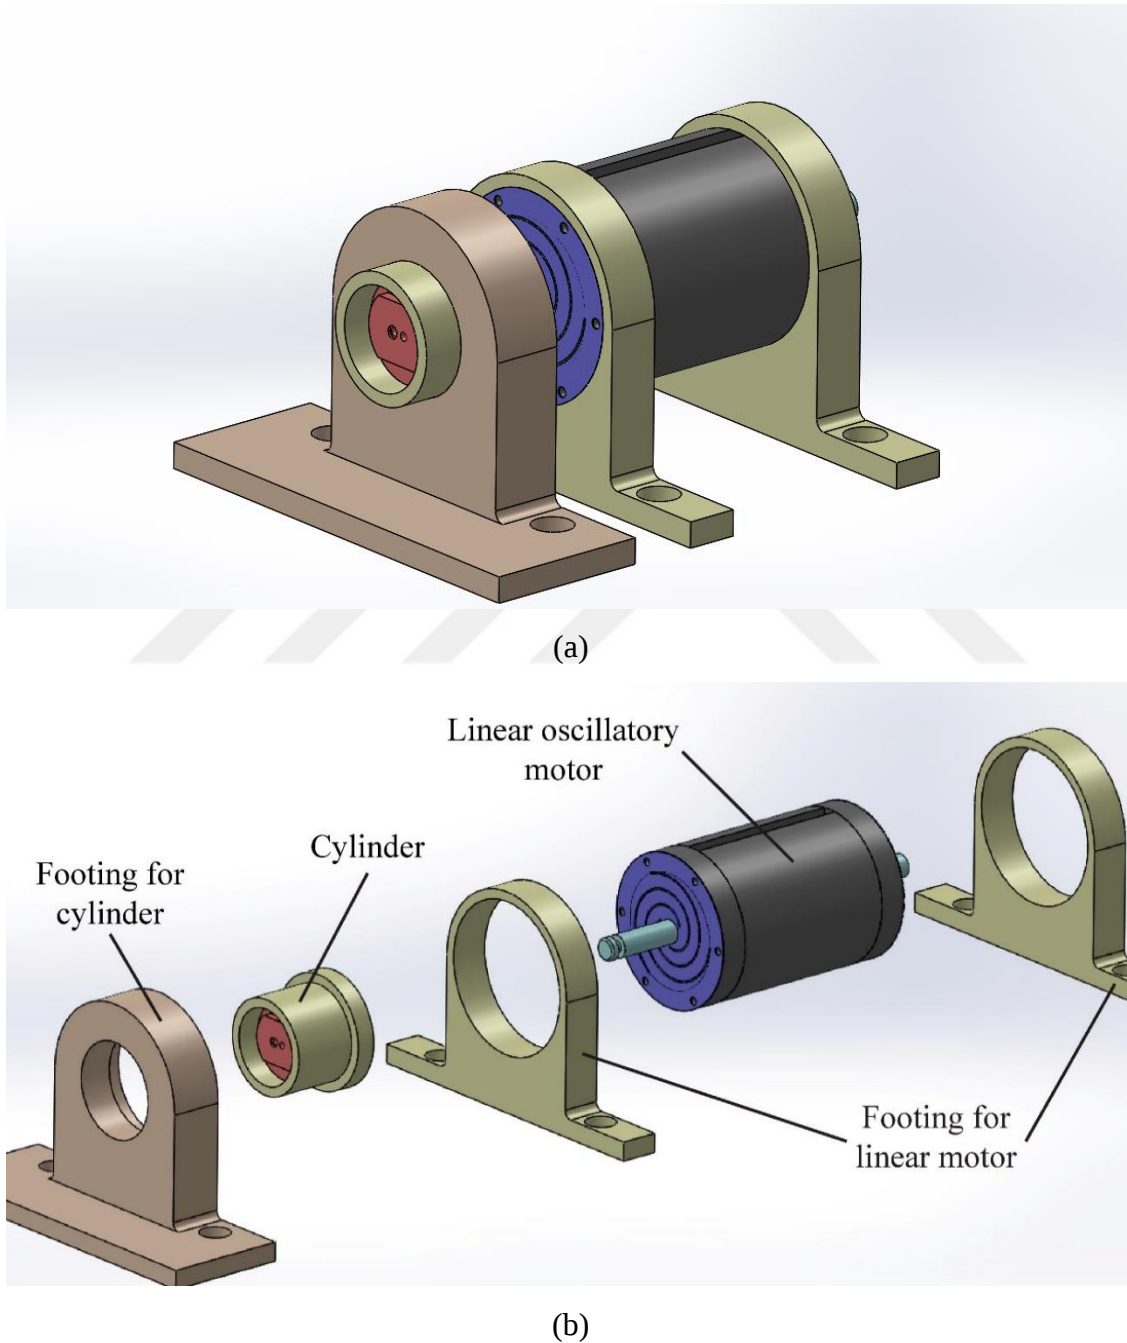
The proposed miniature linear compressor design (a) Overall CAD model (b) Exploded view
